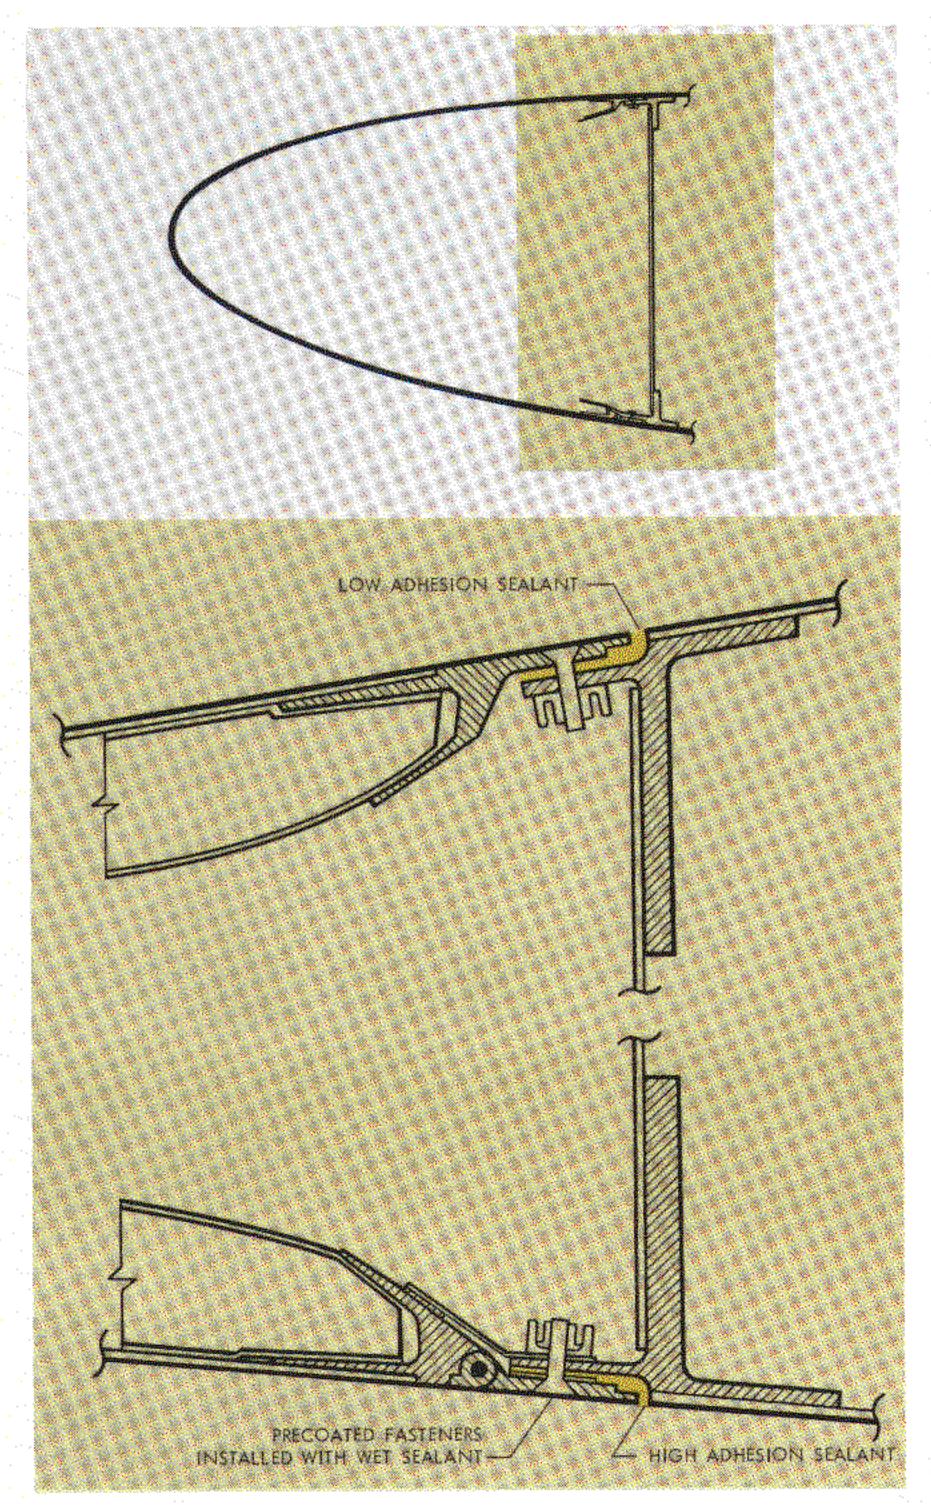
Location of Sealant on Wing Leading Edge-to-Spar Cap Faying Surfaces. High adhesion sealant is permanently installed.
